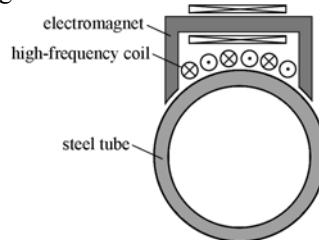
Model of EMAT probe for detecting the defects in steel tubes
